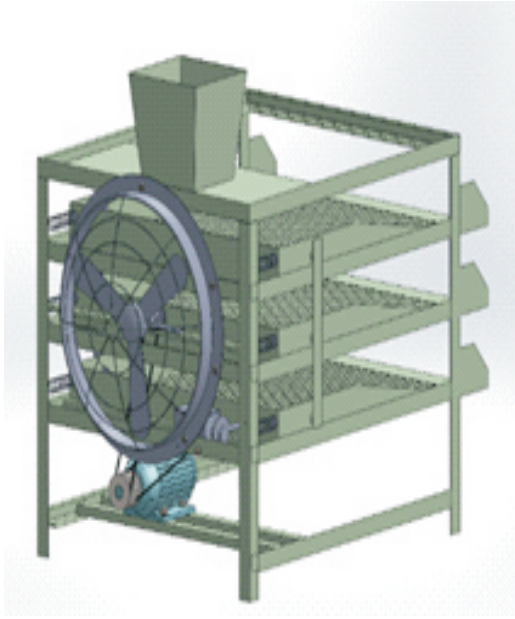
Developed Tiger Nut Cleaning and Sorting Machine
